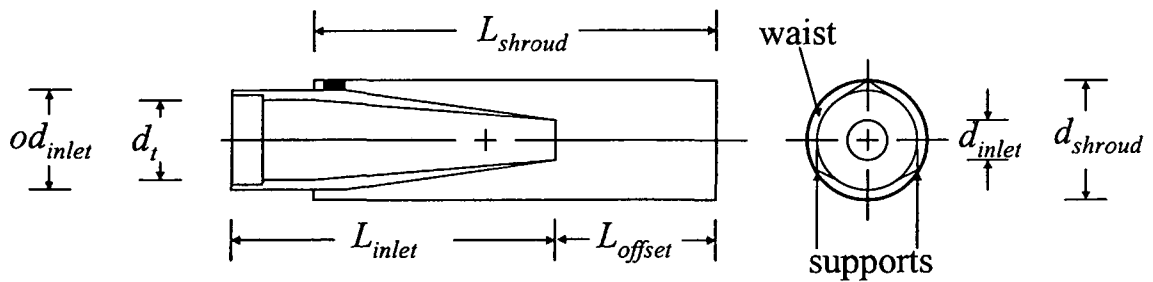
Schematics of a side view of a section through the centerline of the shrouded inlet and of an end view of the inlet. Dimensions of defined parameters are also given.
